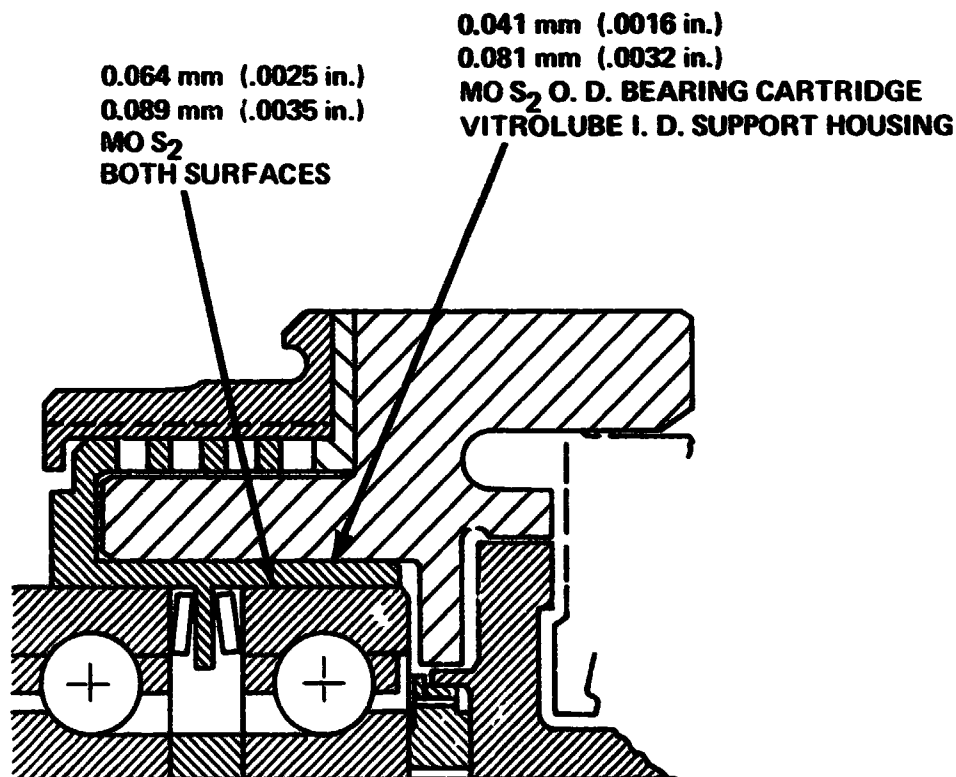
Bearing clearances in HPOTP bearings No. 3 and 4.
